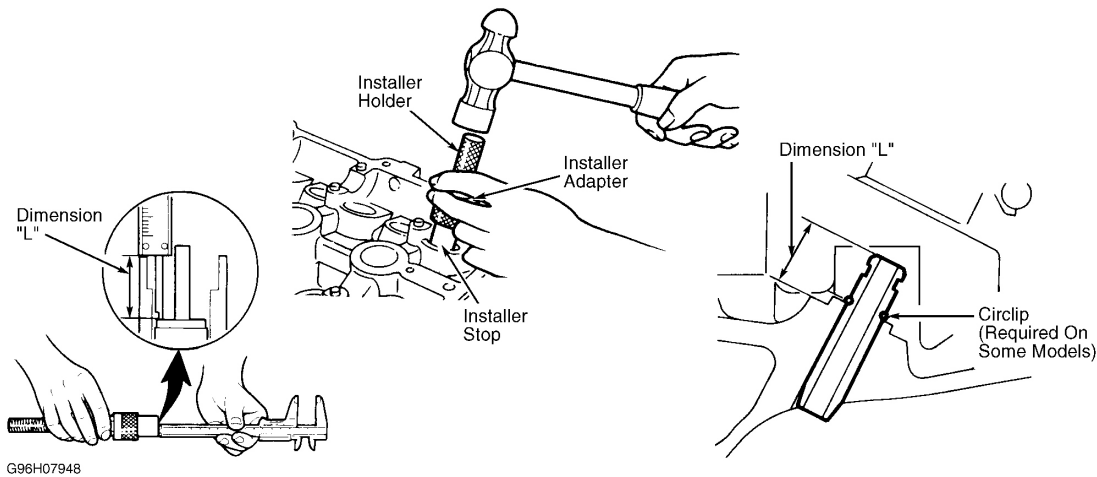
Adjusting Valve Guide Installer & Installing Guide
